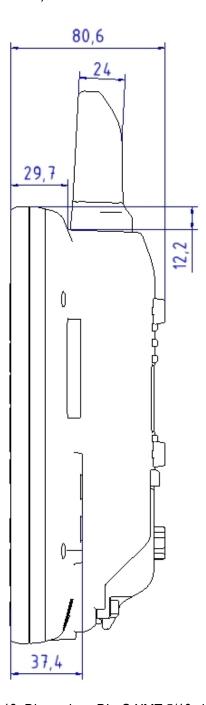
Dimensions DLoG XMT 5/10 side view
